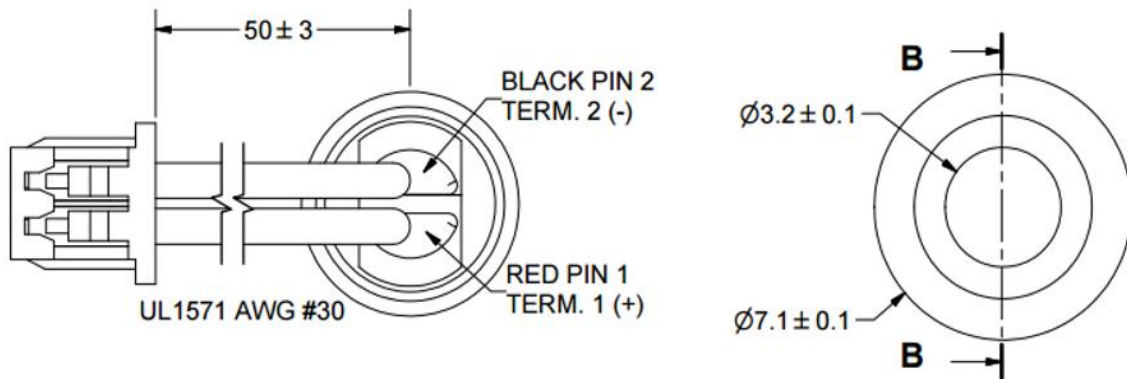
Dimensional drawings of Audio Sensor POW-1644L-LWC50-B-R
